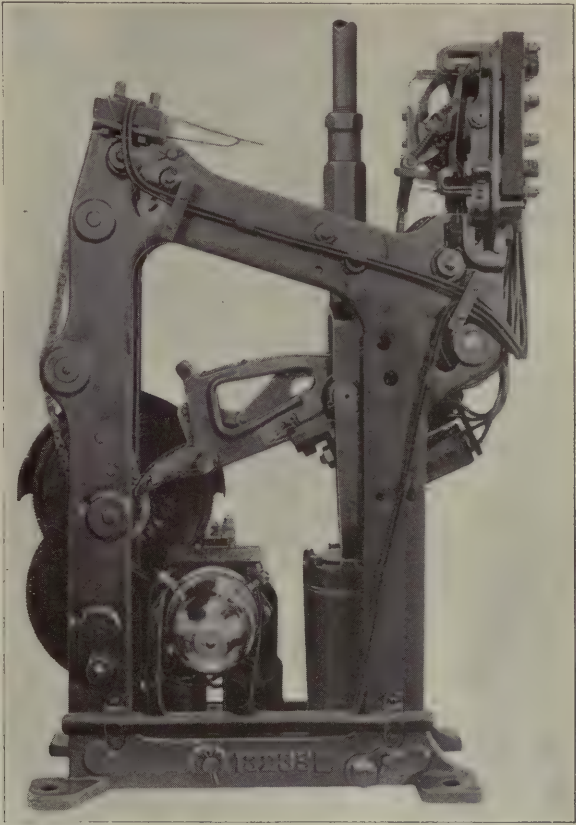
Union Style "S" D. C. Motor Mechanism.
